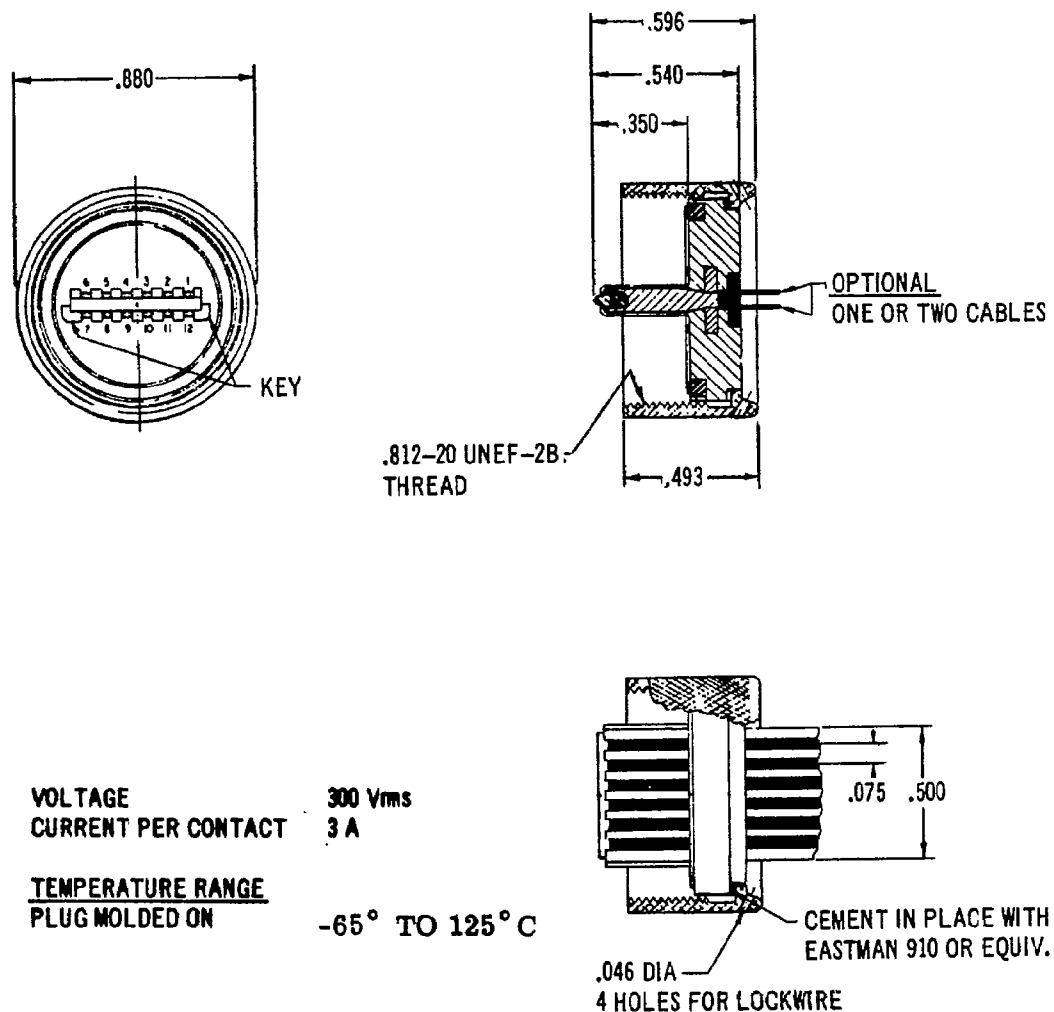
MIL-C-55544/9 Molded-on cylindrical plug assembly, 0.5-inch wide cable.
